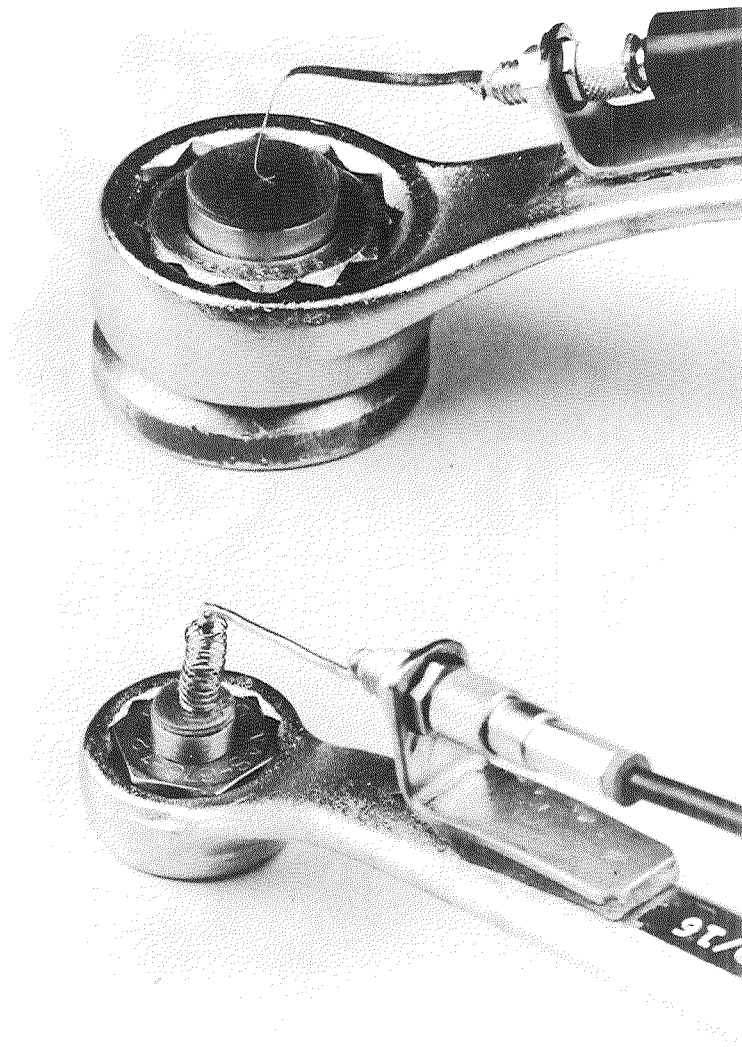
Examples of Transducer and Wrench Connectors for Two Different Bolt Head Configurations. The top bolt has a lightening hole in the head whereas the bottom bolt has a flat hex head.
